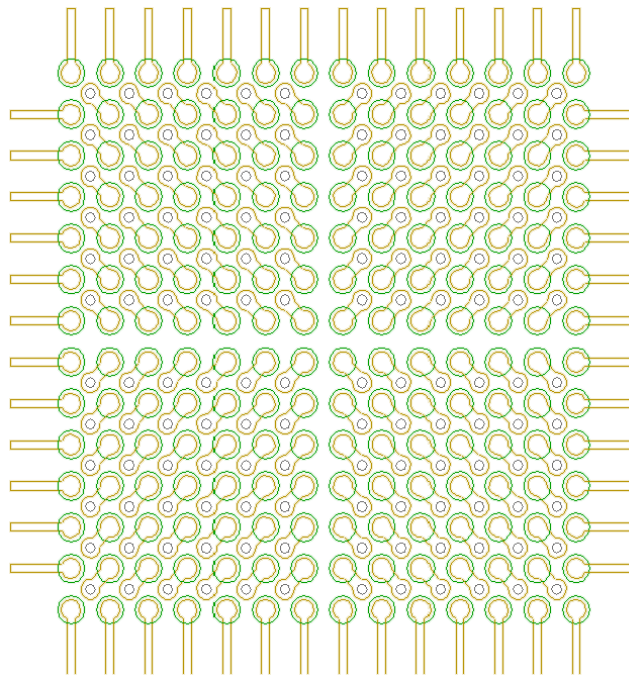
• Suggested Board Layout of Soldered Pads for  $\mu$ C81 CSPs (PCB Lower Layer)
